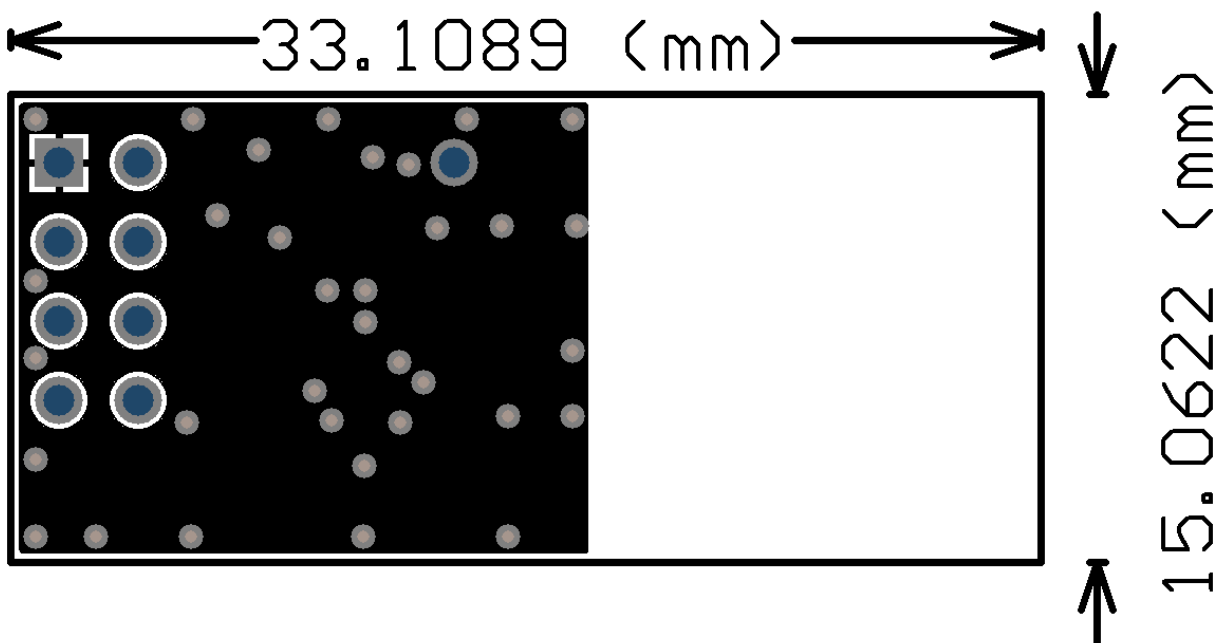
Bottom layer (nRF24L01 RF layout with single ended connection to PCB antenna and 0402 size passive components)
